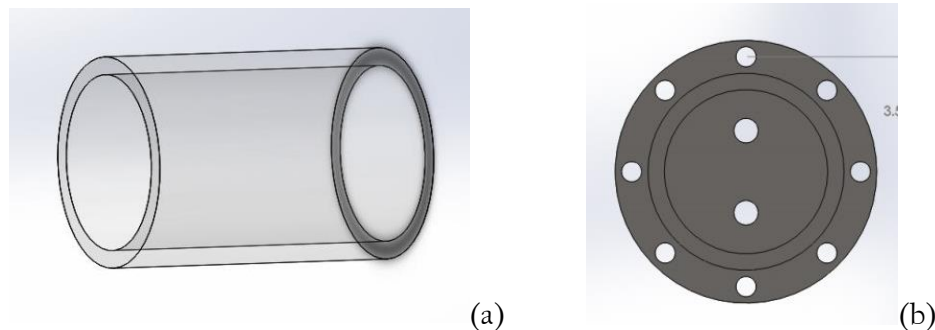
The borosilicate glass cylinder (a) and the stainless steel disk for the evaporator (b)
